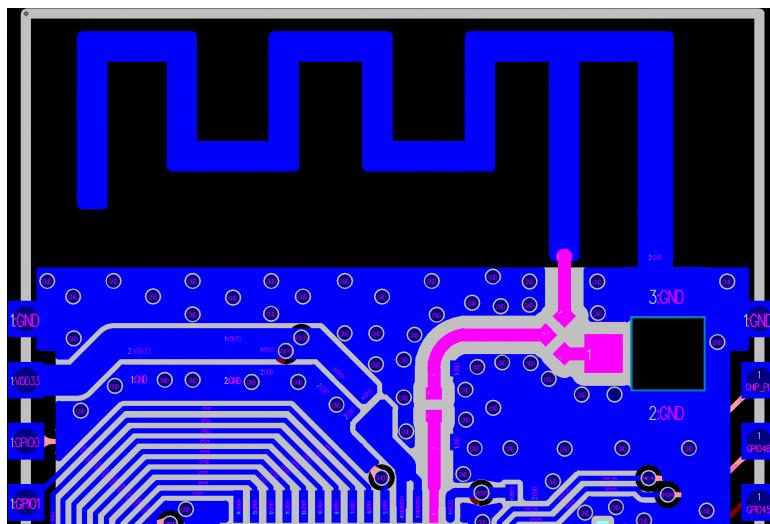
ESP32-S2 RF Layout in a Four-layer PCB Design
